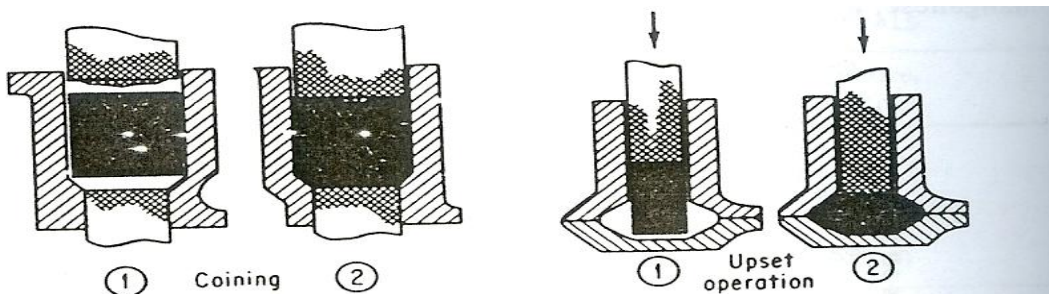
Slug coining and upsetting. (Courtesy American Machinist.)
